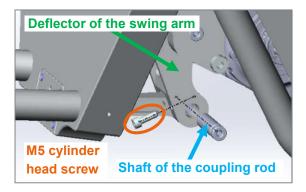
Deflector of the swing arm with M5 cylinder head screw and shaft of the coupling rod
